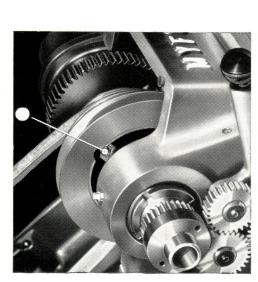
Showing the oil nipple for headstock pulley bearing lubrication.
